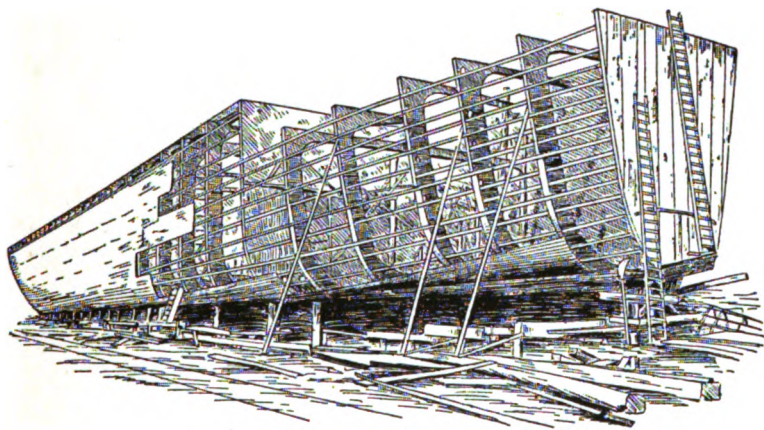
FLOOR PLATES AND DOUBLE BOTTOM
